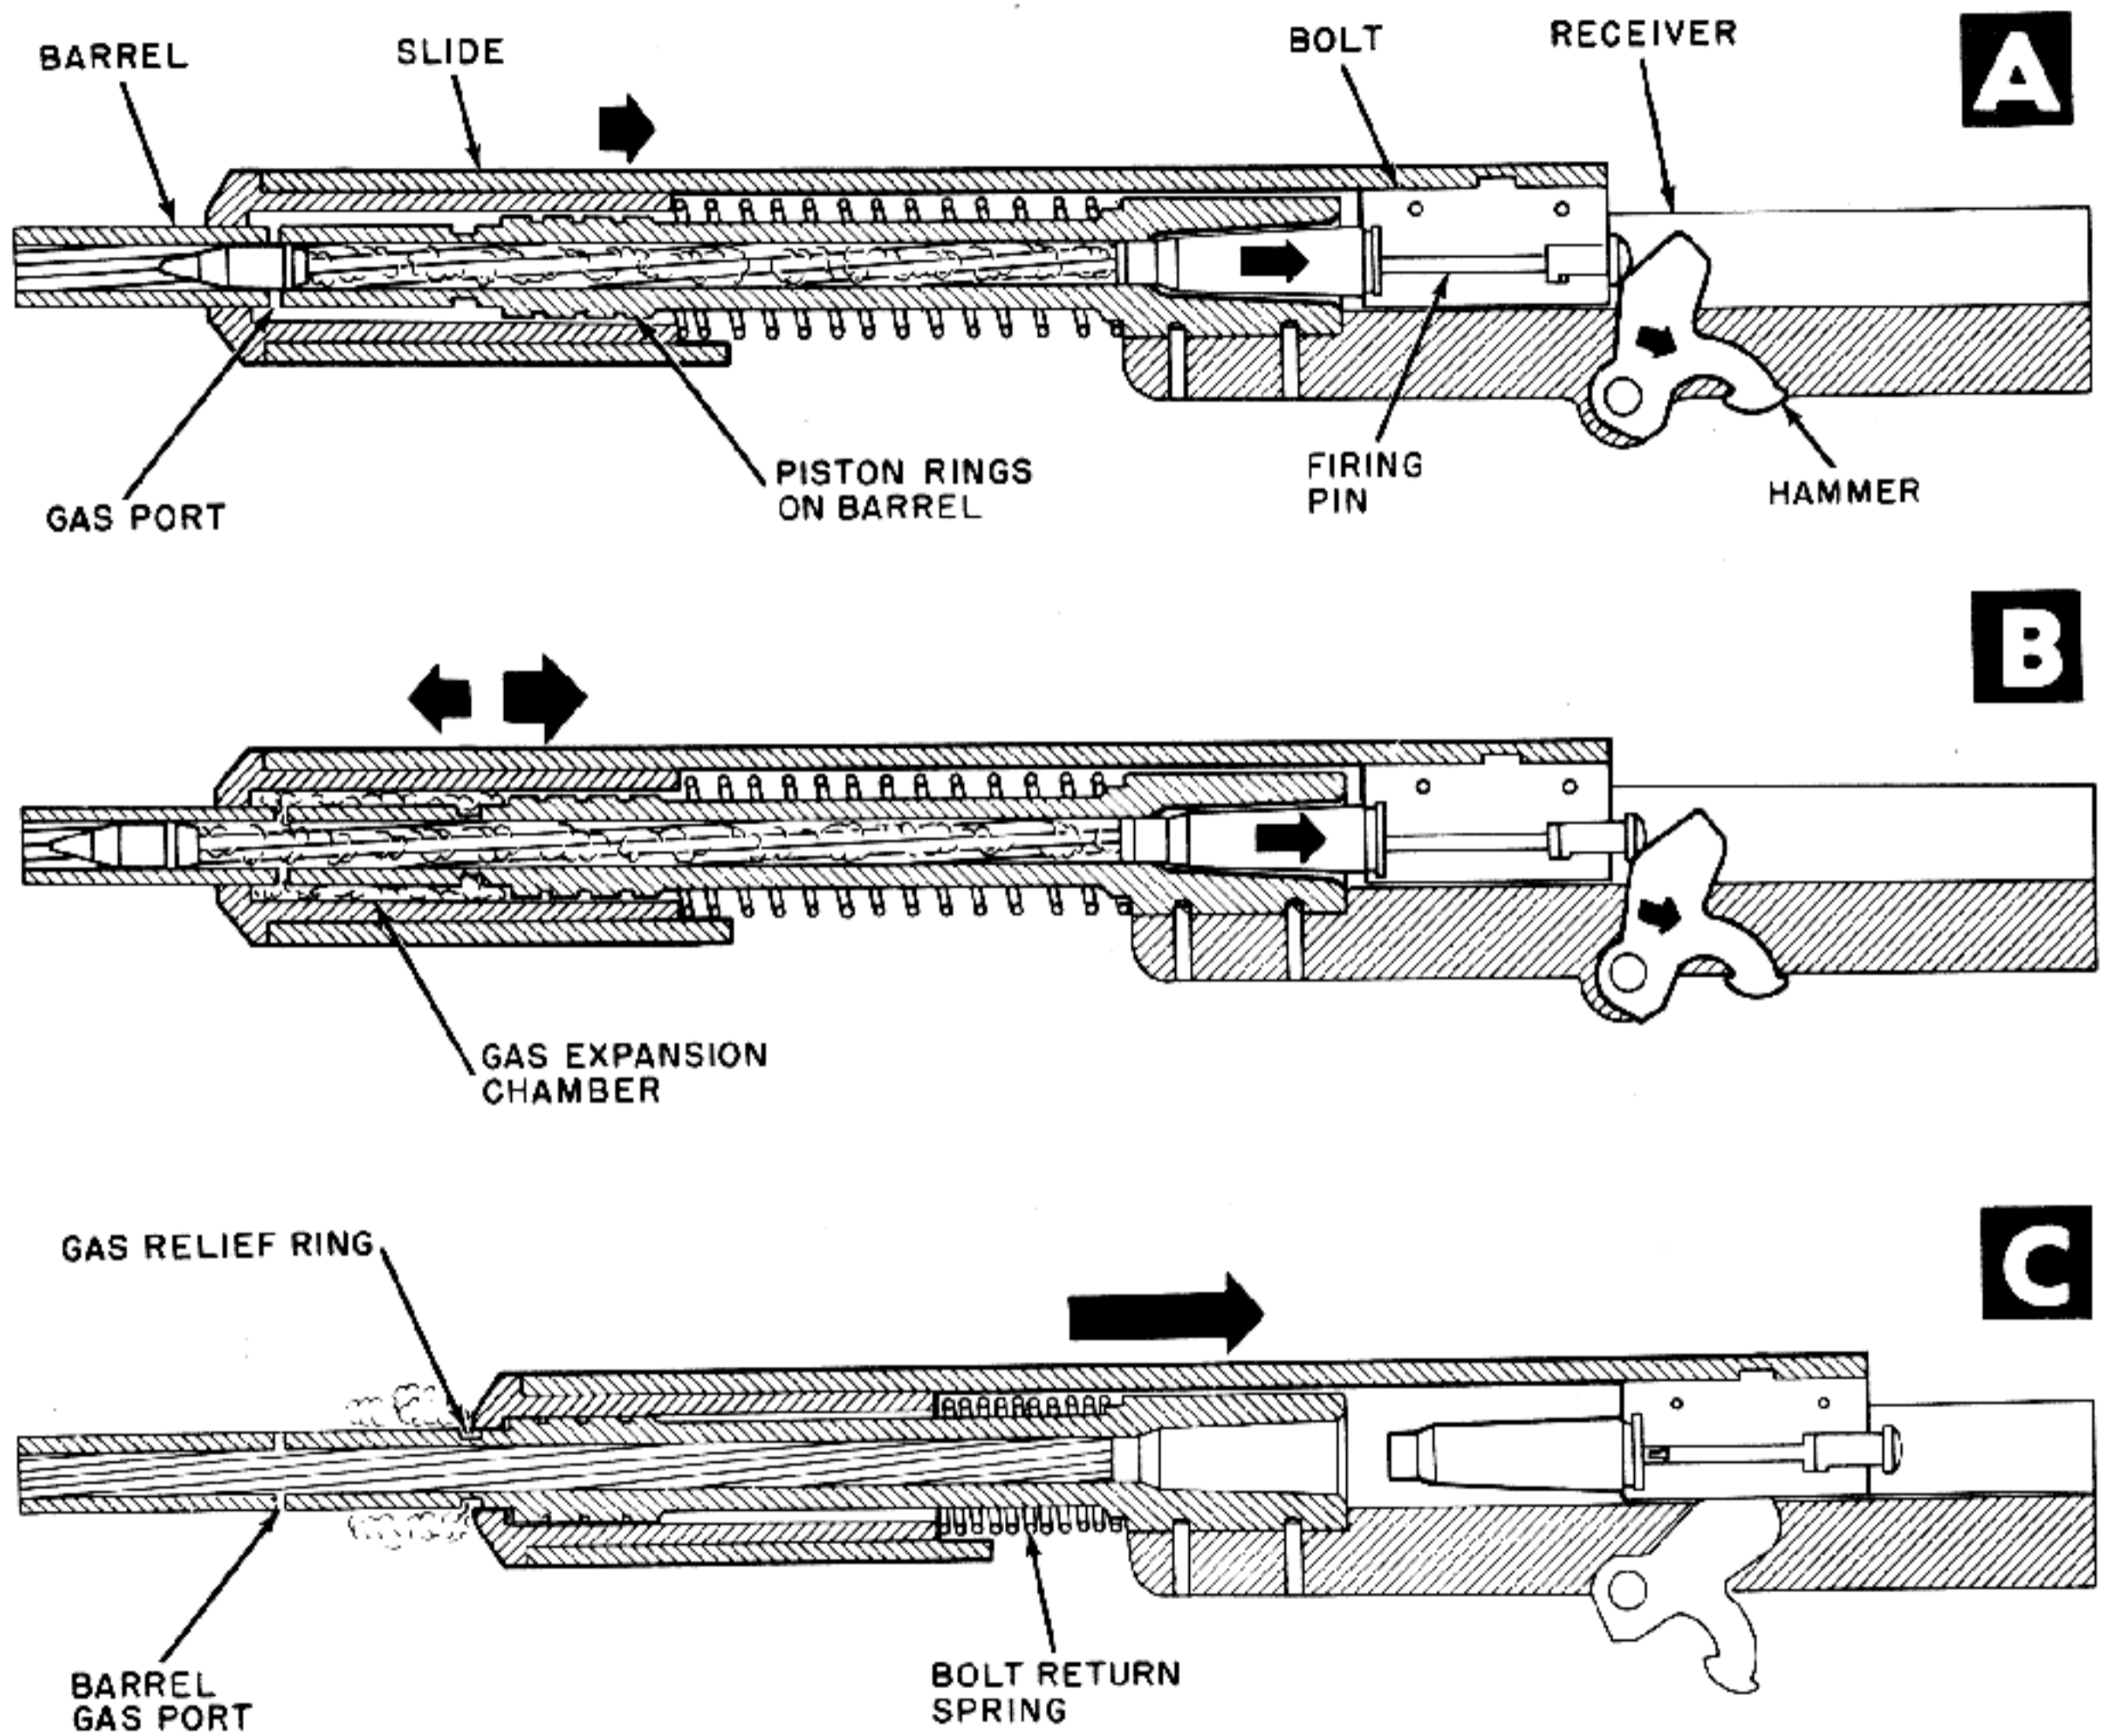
Gas Pressure Acting on Slide Retards Unlocking.
